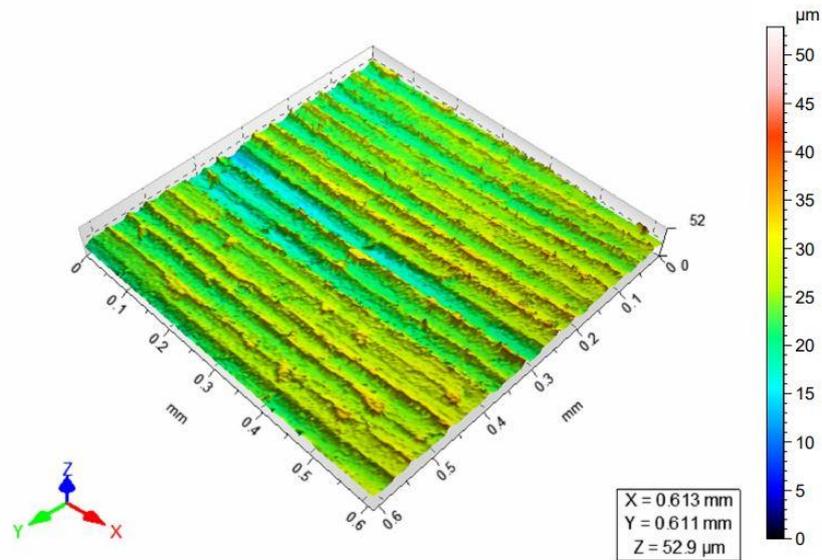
Profilometer 3D view from the surface's roughness of turning machined sample (smooth process) before coating process.
